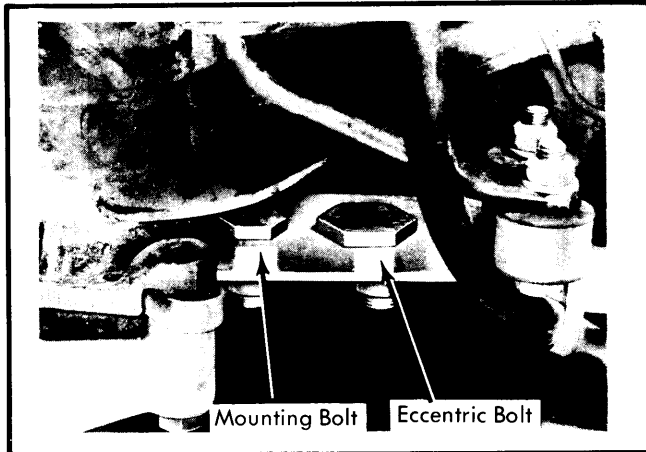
Location of 924 Rear Riding Height Adjusting bolt
